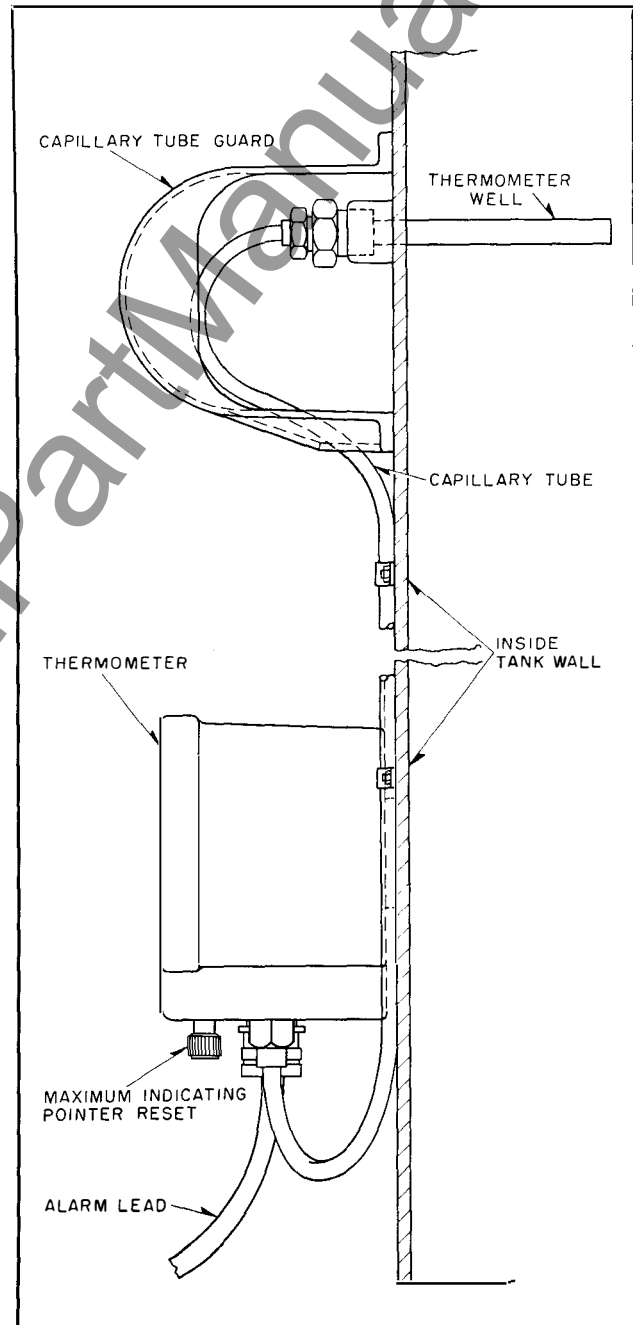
Sectional View of Transformer Showing Mounting of Indicator with Flexible Tube
